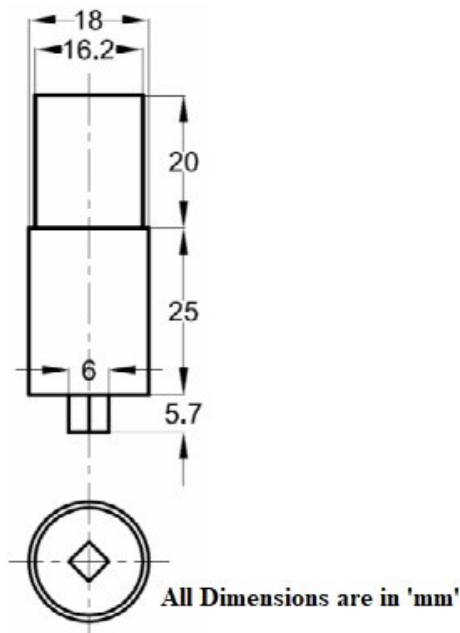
Dimensions of Friction Stir Welding tool.
